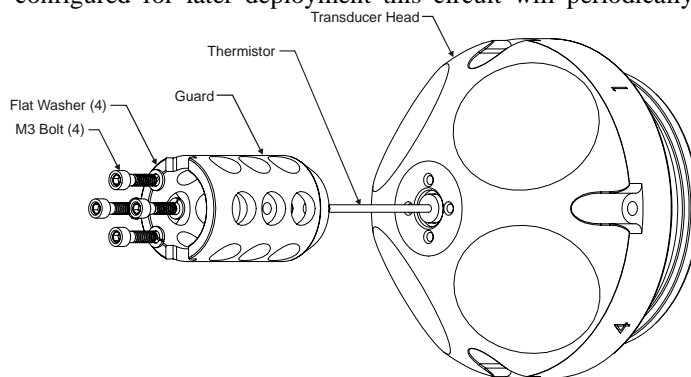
Assembly drawing showing thermistor probe and shield arrangement incorporated into the DVS.
